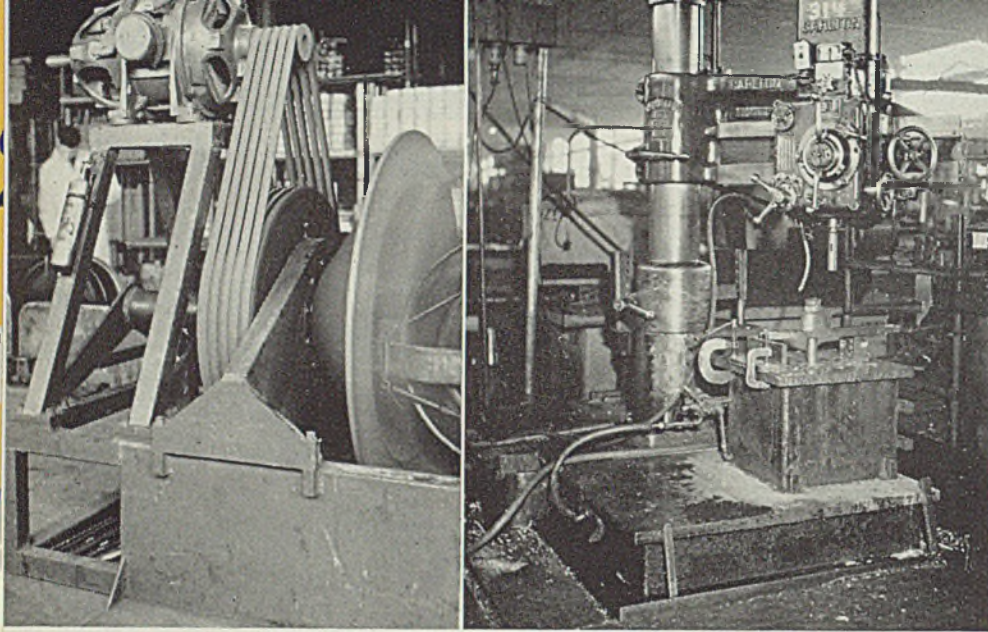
This easily constructed, removable all-welded bracket, left above, provides a simple and economical motor mount
